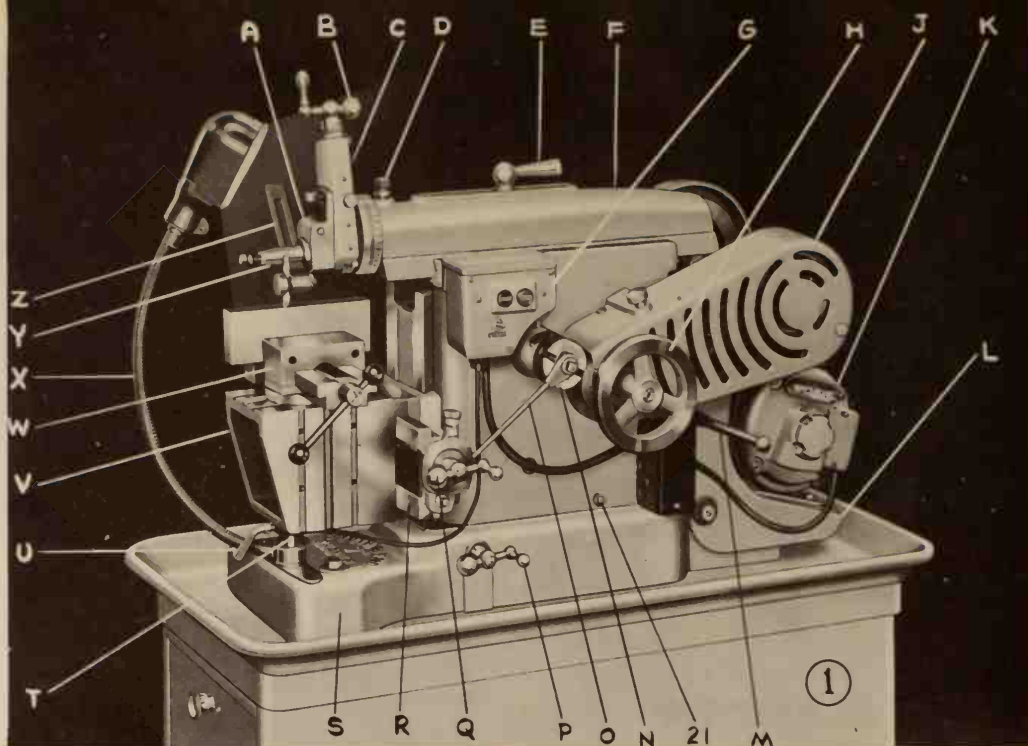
Principal parts of a shaper: (A) Clapper box, (B) Down-feed handle, (C) Head, (D) Headswivel lock screw, (E) Ram clamping handle, (F) Ram, (G) Switch box, (H) Hand wheel, (J) Drive-pulley guard, (K) Motor, (L) Motor cradle, (M) Tension release lever, (N) Eccentric, (O) Feed rod, (P) Table elevating crank, (Q) Cross feed crank, (R) Cross-rail, (S) Base, (T) Work-table support, (U) Support locking handle, (V) Work table, (W) Vise, (X) Lamp, (Y) Tool post, (Z) Tool holder. (South Bend Lathe)
